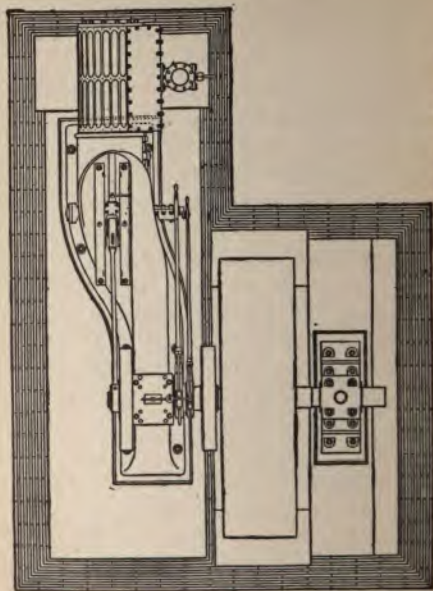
PLAN VIEW, TANGVE STYLE, BUCKEYE ENGINE.
